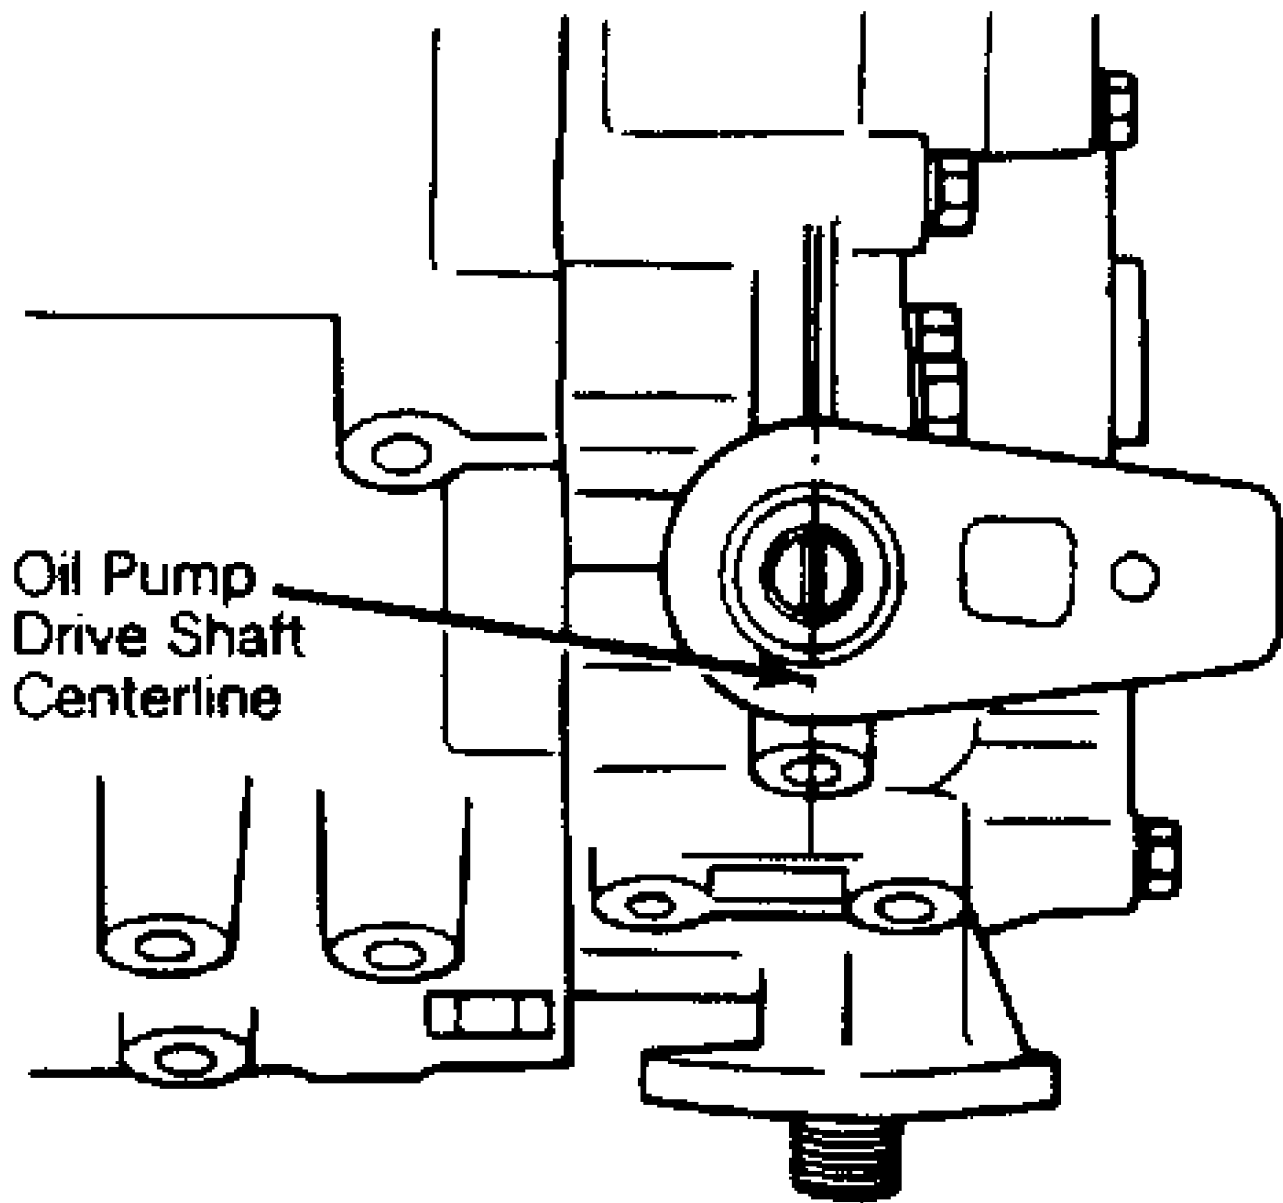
Checking Oil Pump Drive Shaft Alignment on 1.9L Models
